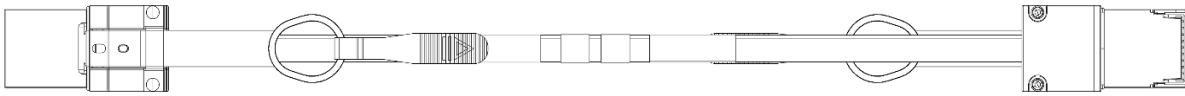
2D Drawing of a PCIe+ I/O Cable
